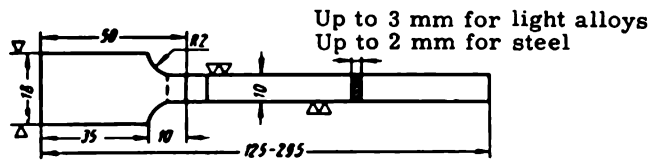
Specimen for testing vibration resistance of lap soldered joints
